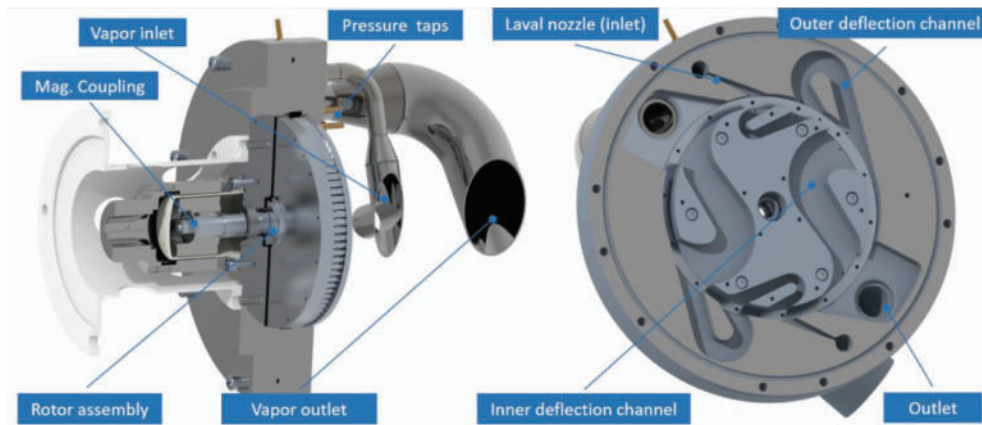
Cut away view and blade to blade cross section of the radial re-entry turbine
